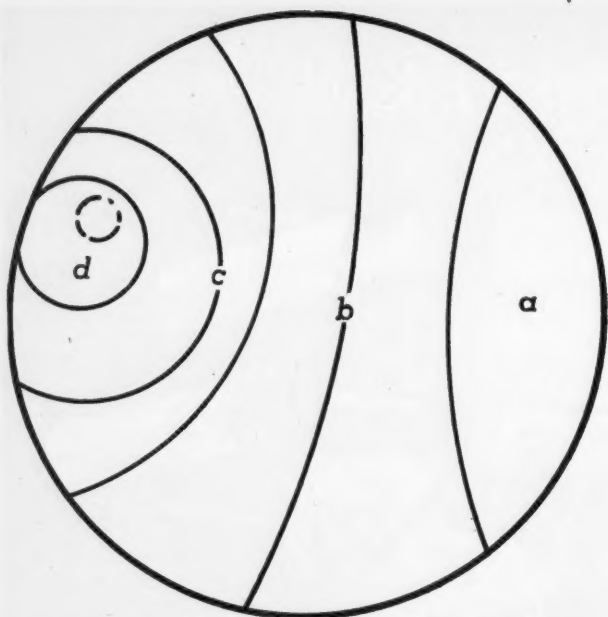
Diagram of Fractured Axle Surface. a — Original fracture, worn smooth by rubbing of contacting surfaces; b — center of area containing lines indicating successive fractures; c — area untarnished but dull and velvety; d — bright granular surface fresh fracture.
